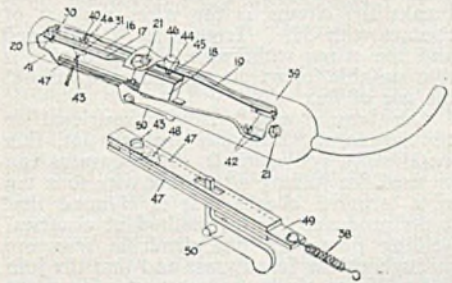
The same patent (B.P. 560,500/1944) describes an alternative apparatus for joining wires of thicker section.
